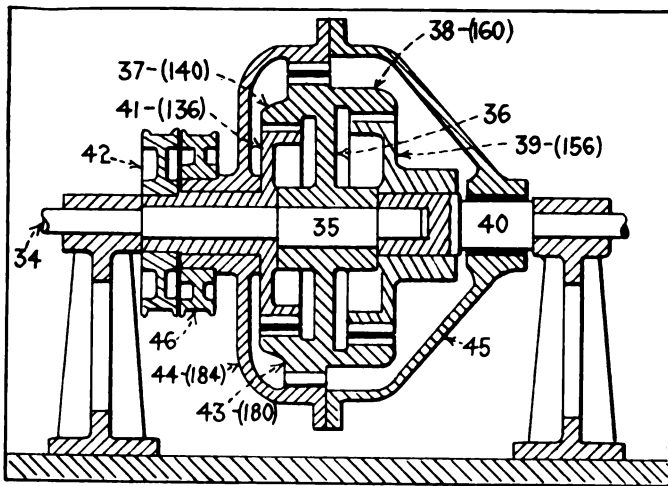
Section of the Peters planetary gear for large reductions (with the number of teeth on each gear-wheel in parenthesis)
